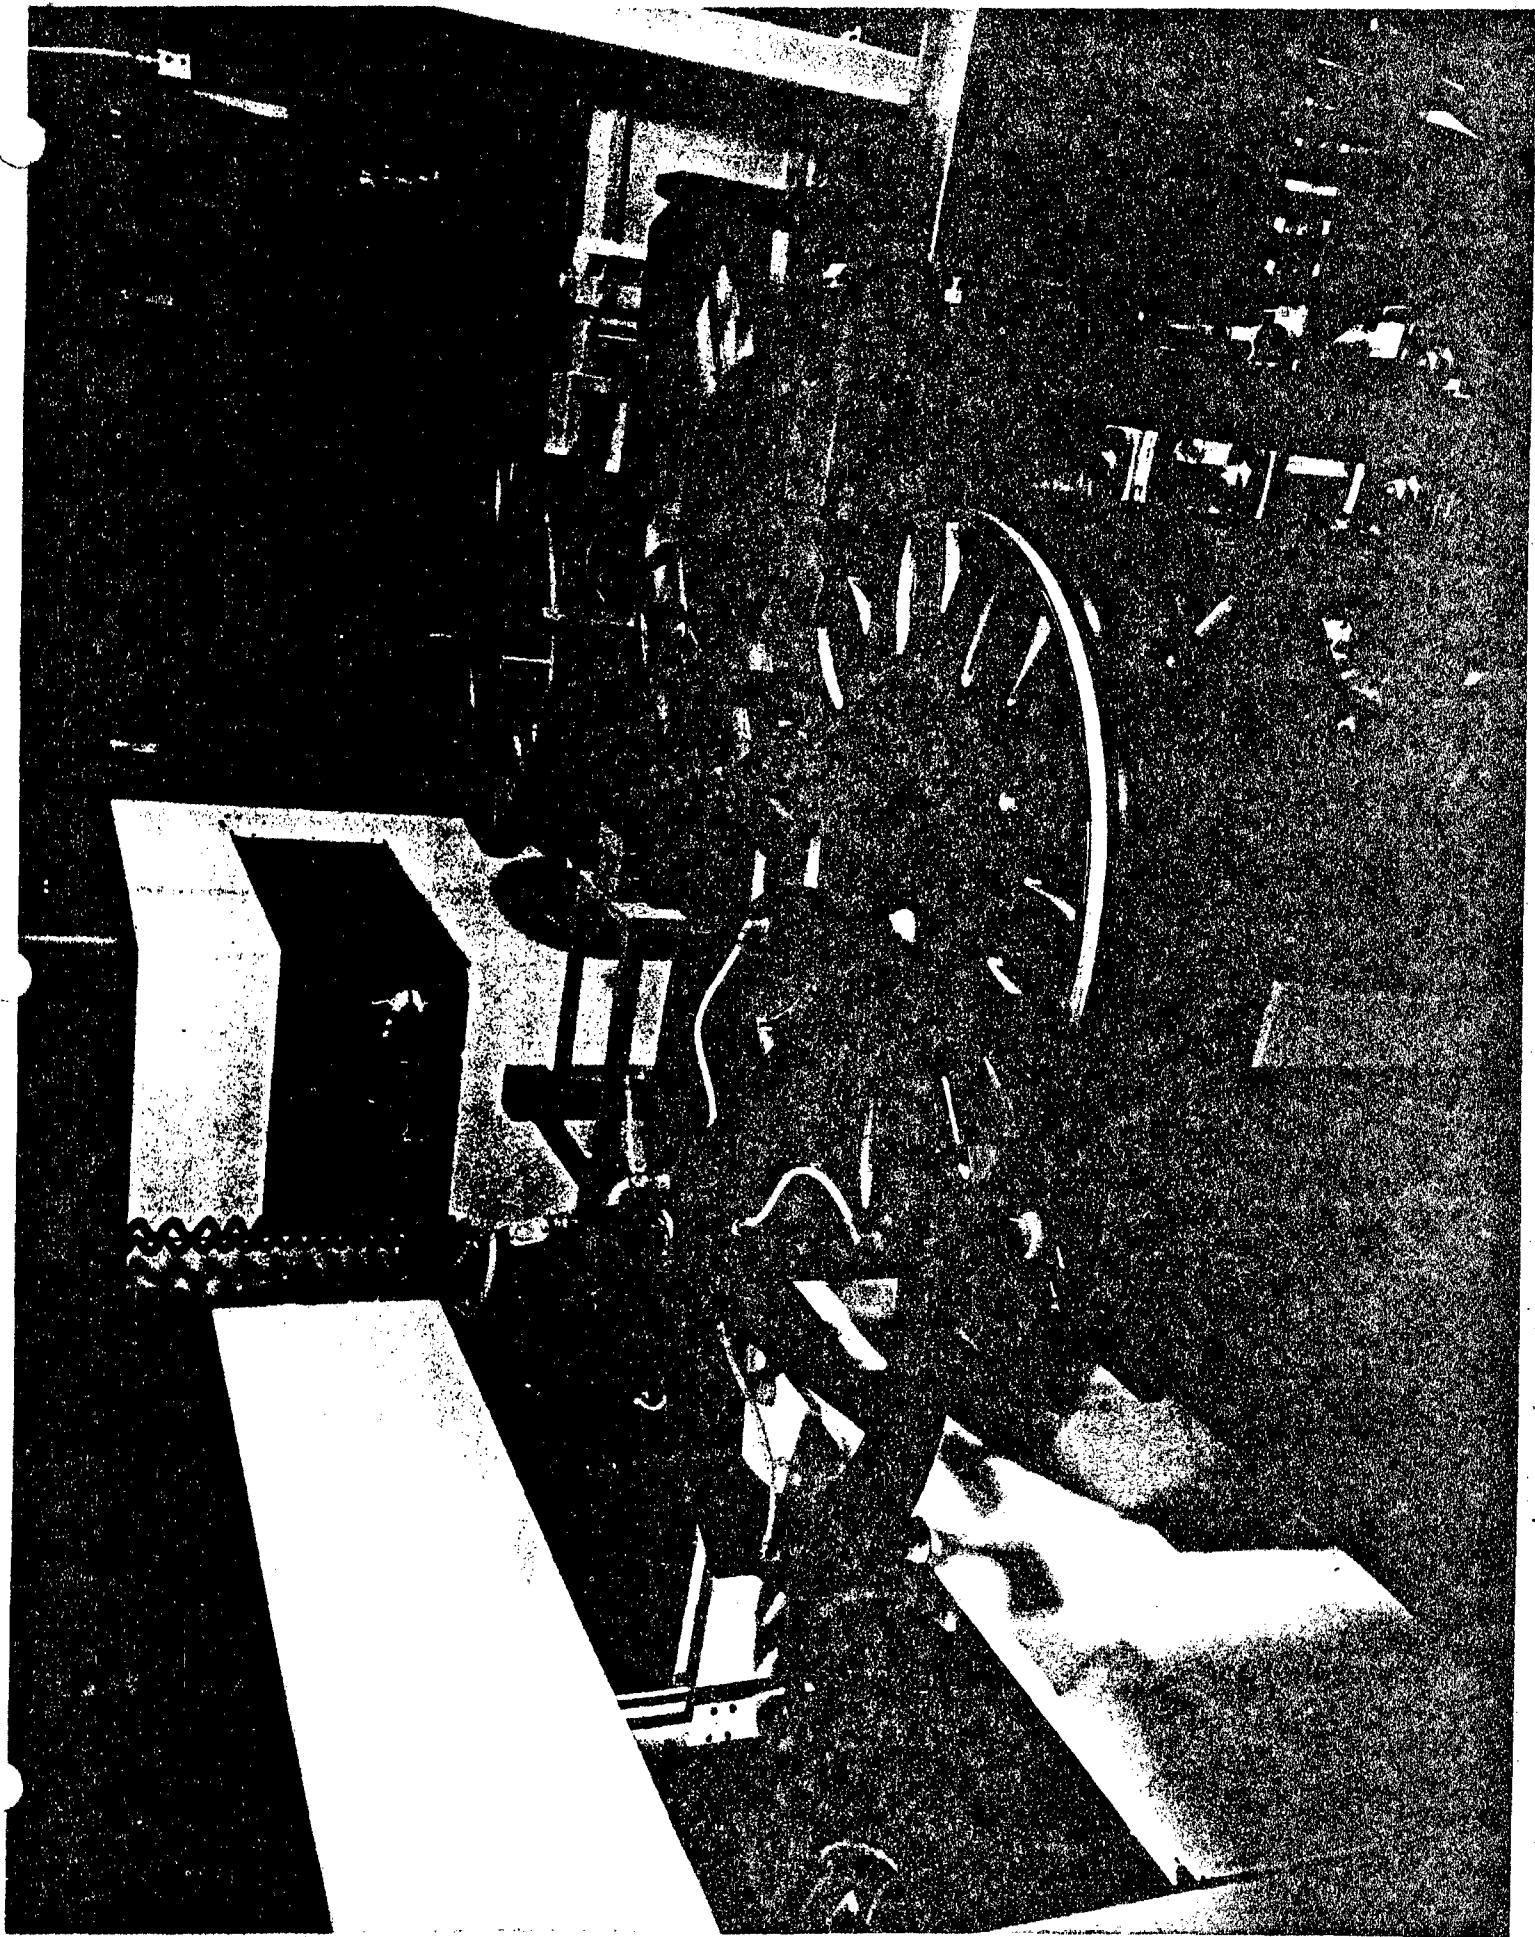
PRODUCTION RECUPERATOR LASER WELDER
